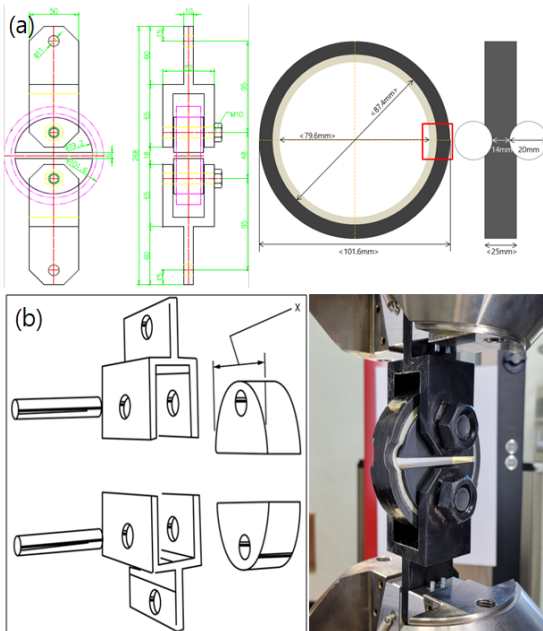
2D drawings of split disk test fixtures and specimens (a) and hoop tensile test (b)
